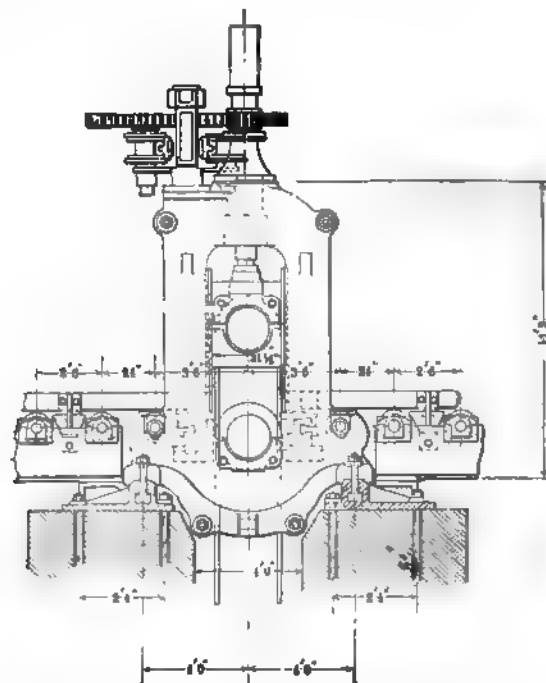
SIDE ELEVATION LLOYD-BOOTH 38-IN. BLOOMING MILL AT SHARON STEEL COMPANY'S WORKS, PA.
